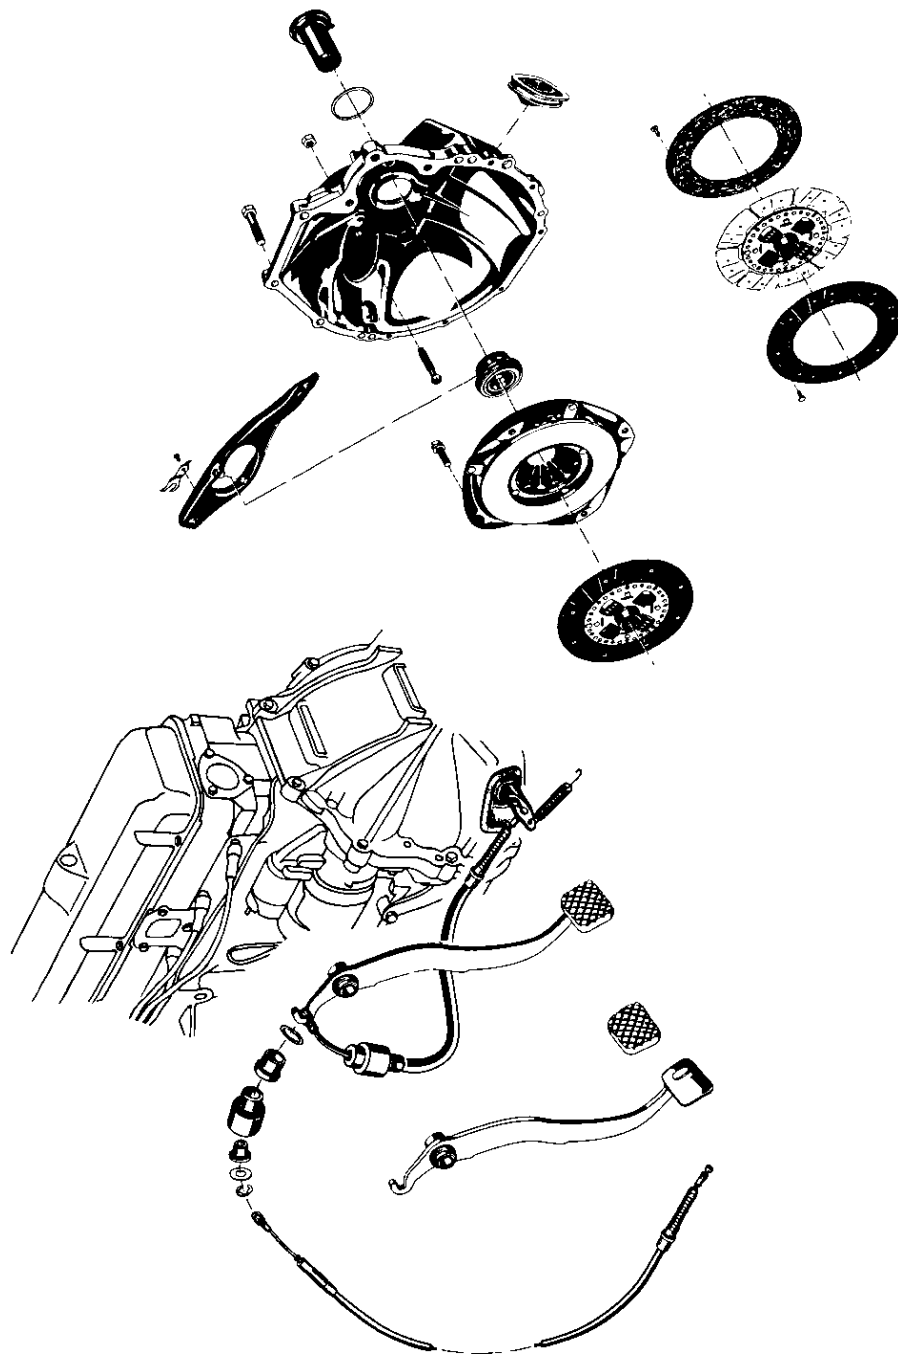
Clutch Pedal Adjustment • Opel 1900 and Manta
